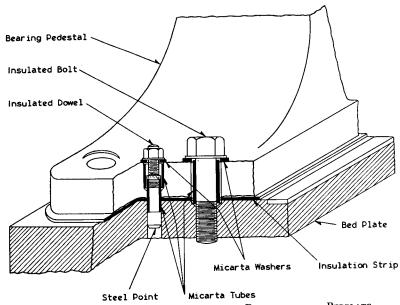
Method of Insulating Bearing Pedestal from Bedplate.
